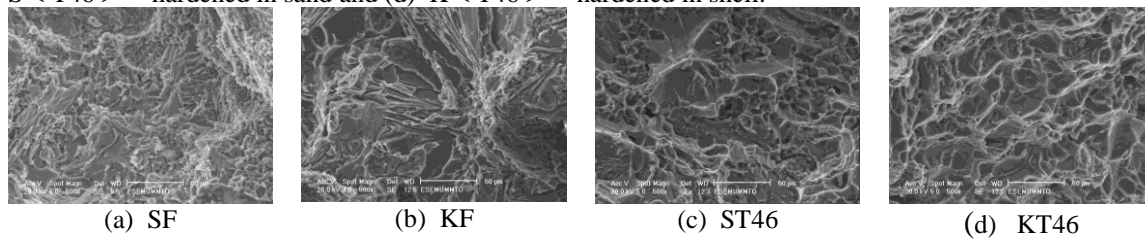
Tensile fracture surfaces obtained with a scanning electron microscope (SEM) of the AlSi7ZnMg alloy casted in sand (S) and in shell (K): (a) S < F > - crude of sand casting , (b) K < F > - crude of shell casting, (c) S < T46 > - hardened in sand and (d) K < T46 > - hardened in shell.
